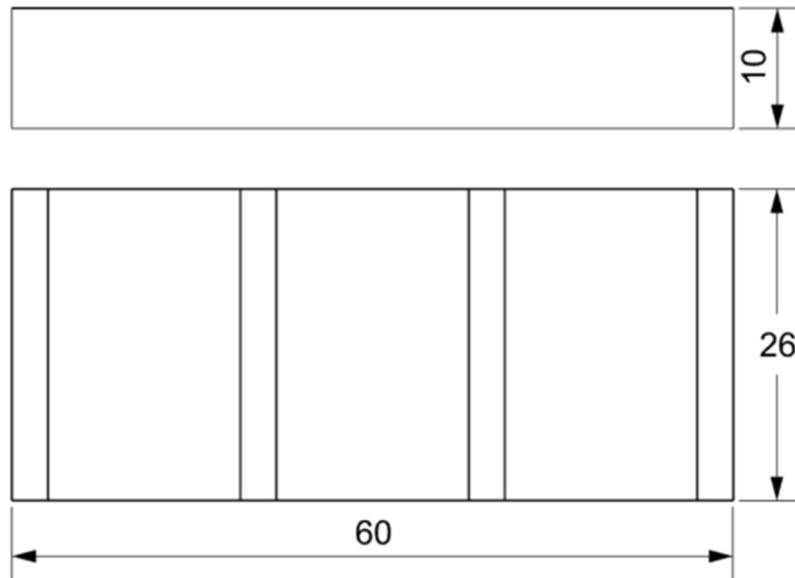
CAD model geometry and dimensions (mm) of 3D-printed workpiece, 1, 2, and 3, indicating burnishing area.
